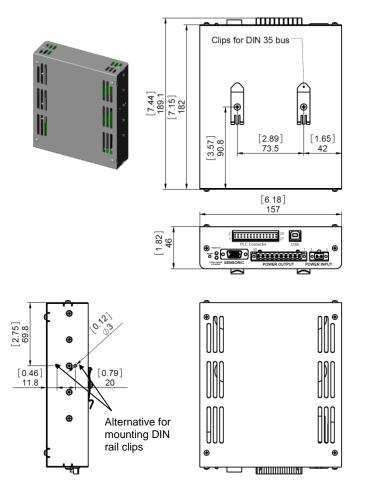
Basic dimensions (in mm) of controller LPC-600.2 (same basic dimensions for LPC-600.1)
